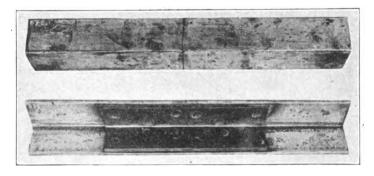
Single-Strap Butt Joint, Spot Welded Courtesy of Toledo Electric Welder Company
